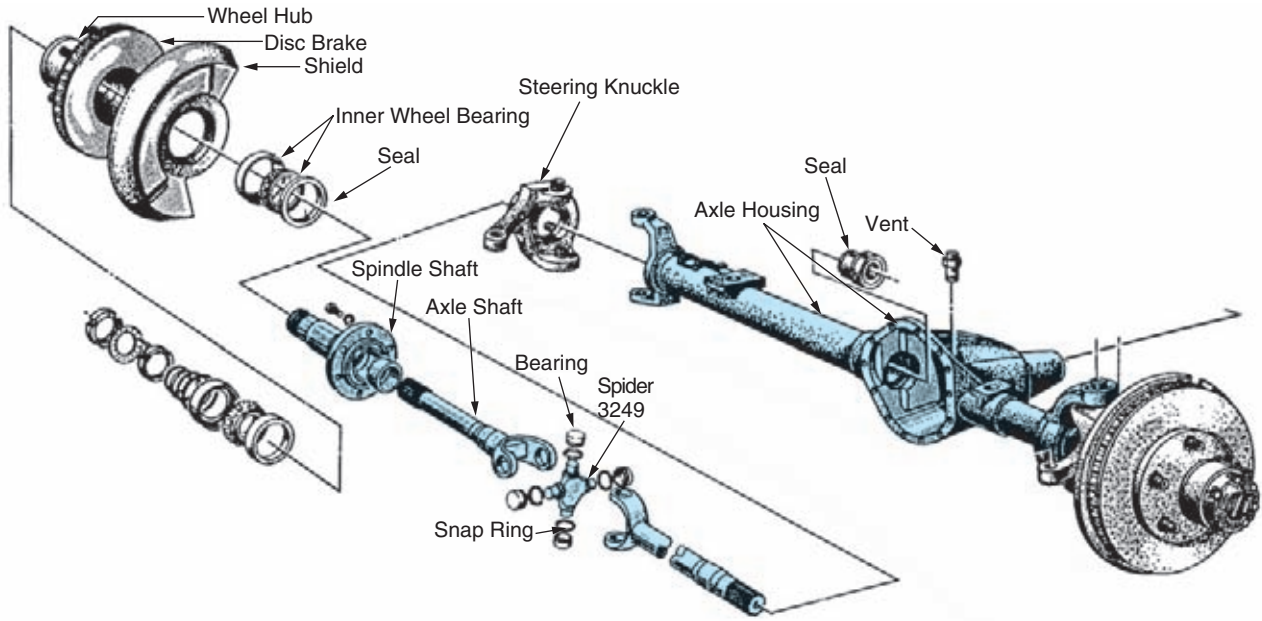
Solid front drive axle housing with the left-side axle shaft and hub assembly. (Courtesy of Ford Motor Company)
